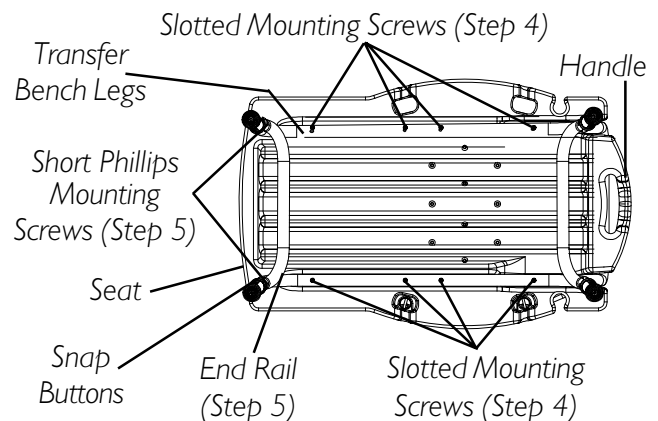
ATTACHING THE TRANSFER BENCH LEGS
